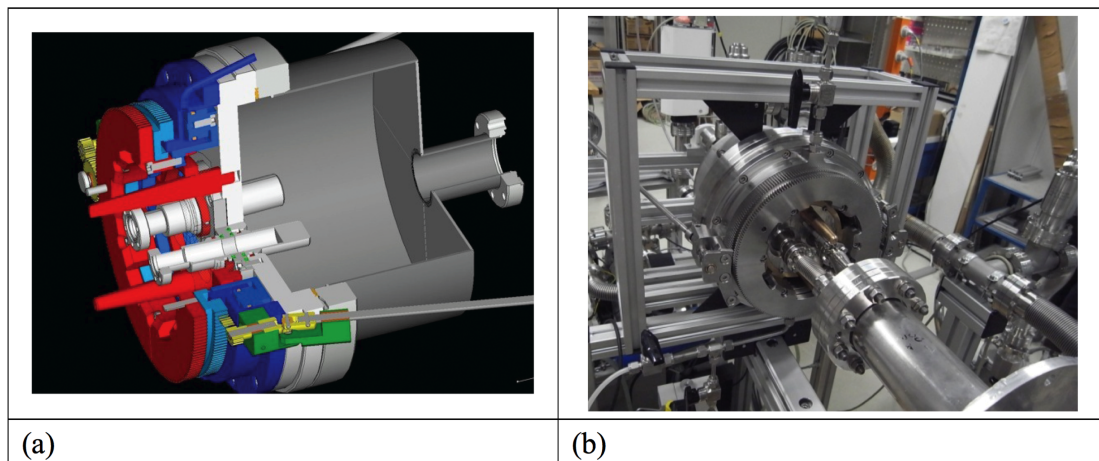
RVC mechanism. (a) A cut view of a test mock-up. (b) The mock-up for vacuum test.
